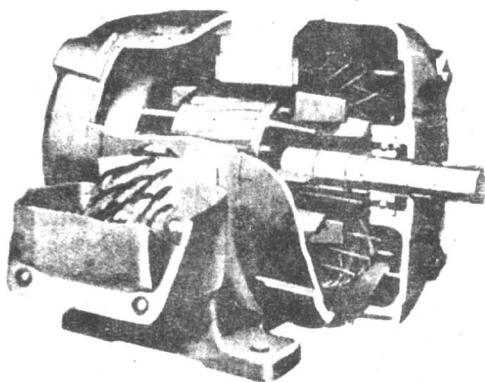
Squirrel cage rotor, similar to split-phase rotor (Courtesy Westinghouse)
